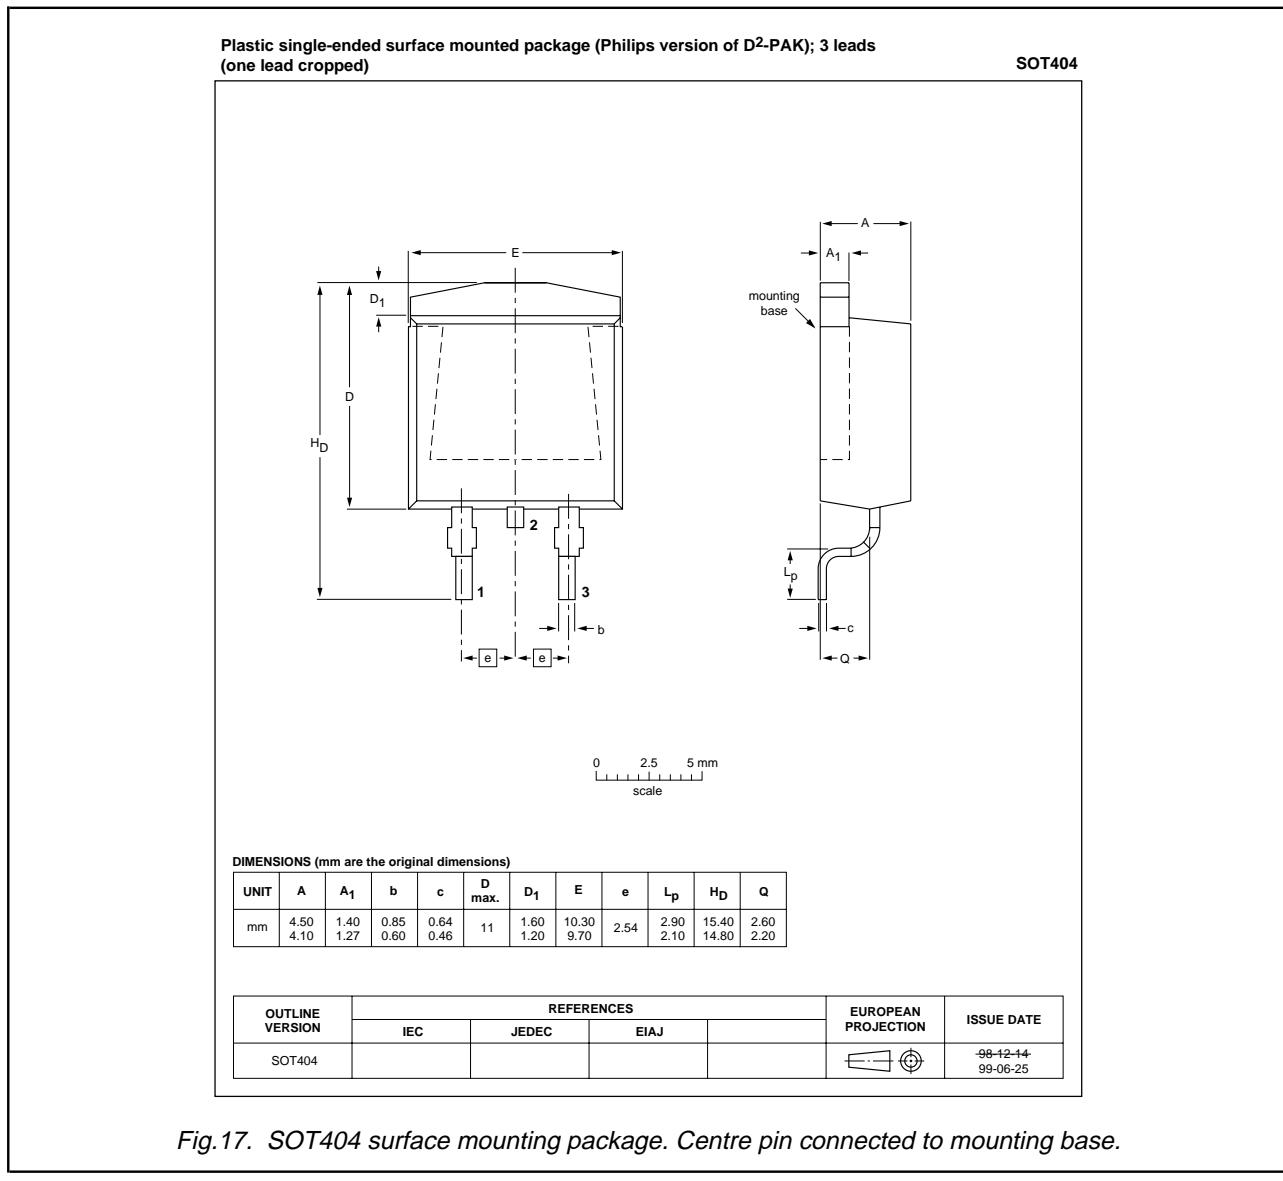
SOT404 surface mounting package. Centre pin connected to mounting base.
